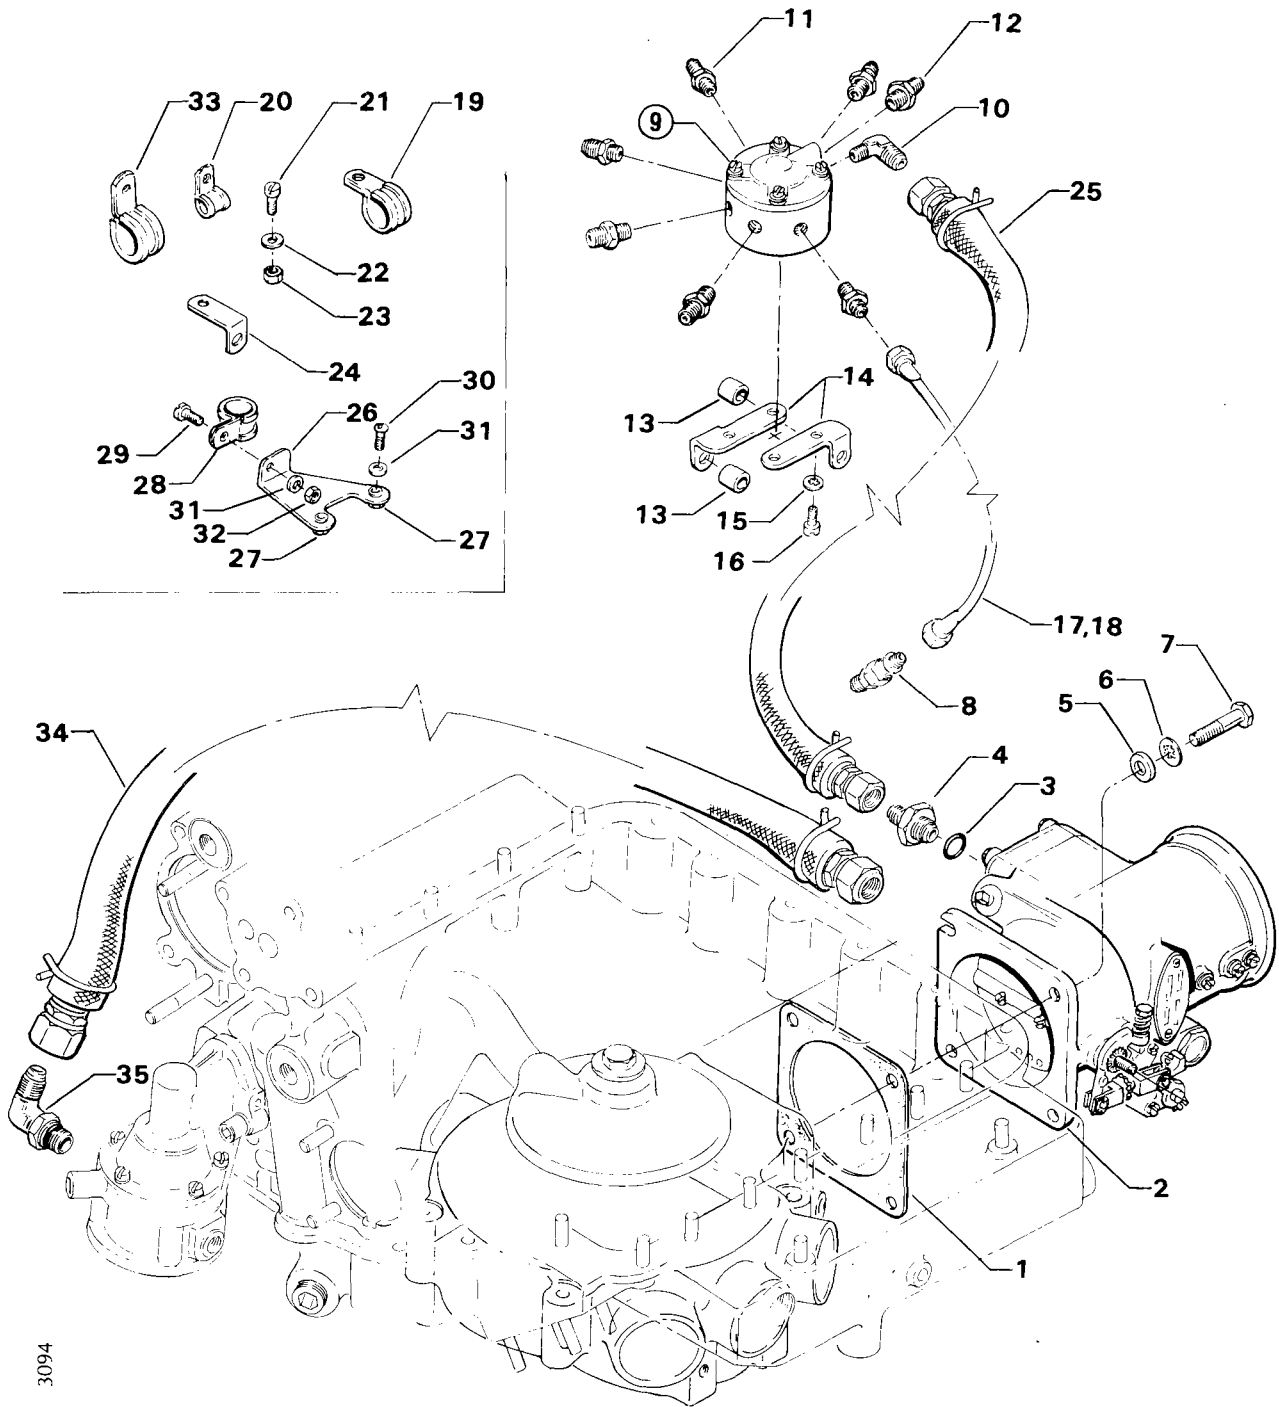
FUEL INJECTOR, FUEL MANIFOLD AND INJECTION NOZZLES
